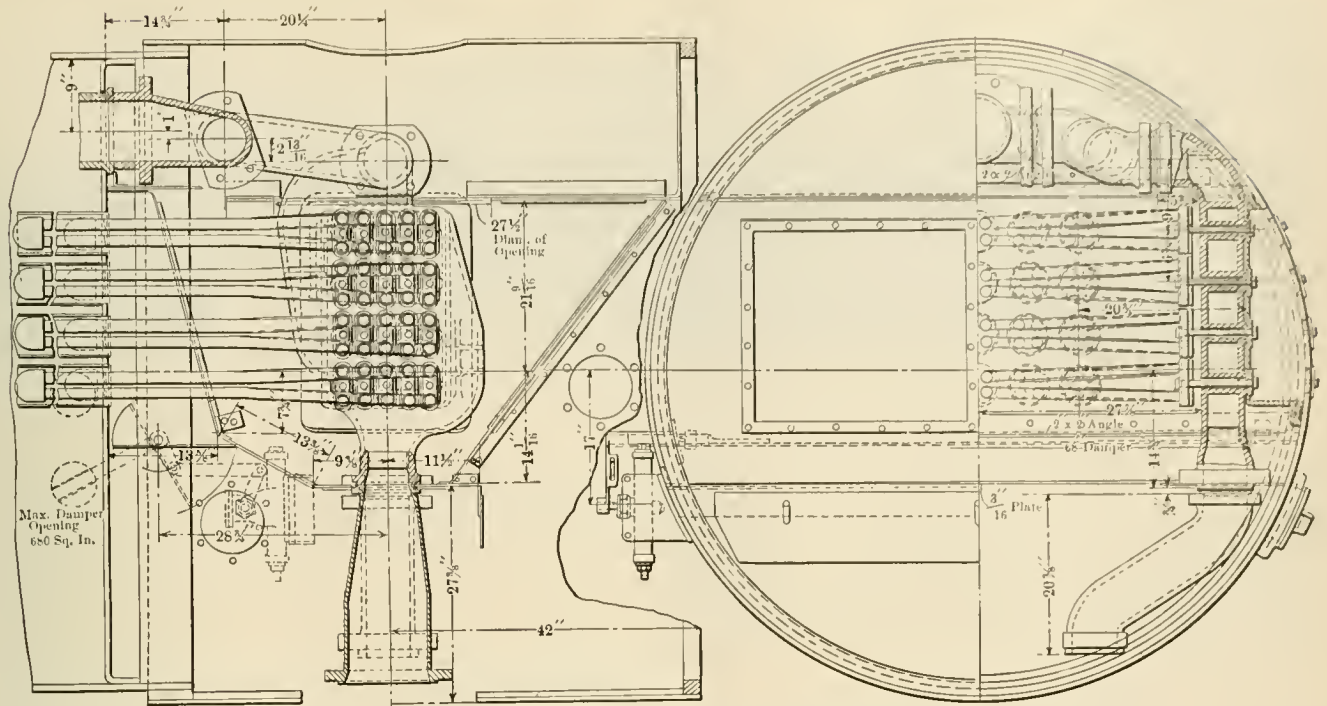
DETAILS OF SIDE HEADERS—NEW FIRE TUBE SUPERHEATER.
